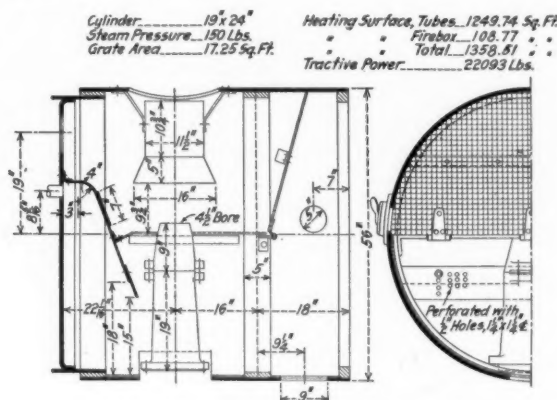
Front End Formerly Used on a Six-wheel Switcher
